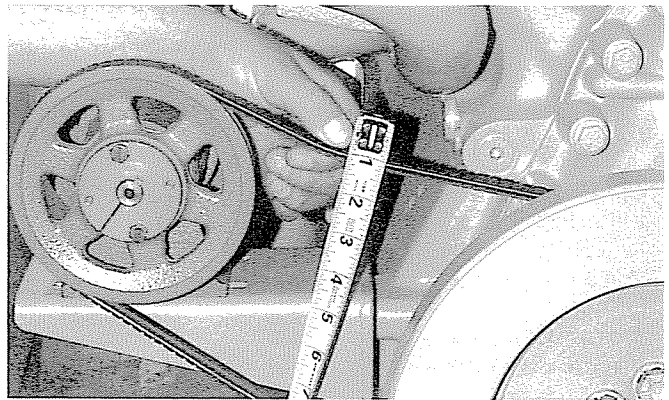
Aftercooler Auxiliary Water Pump Drive Belt
